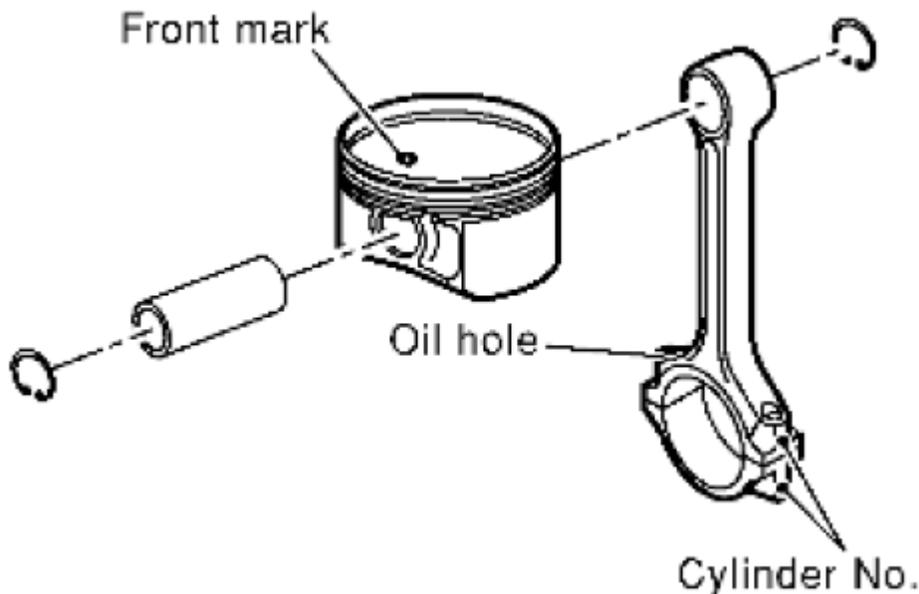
Positioning Front Mark On Piston Crown And Oil Holes And Cylinder No. On Connecting Rod
